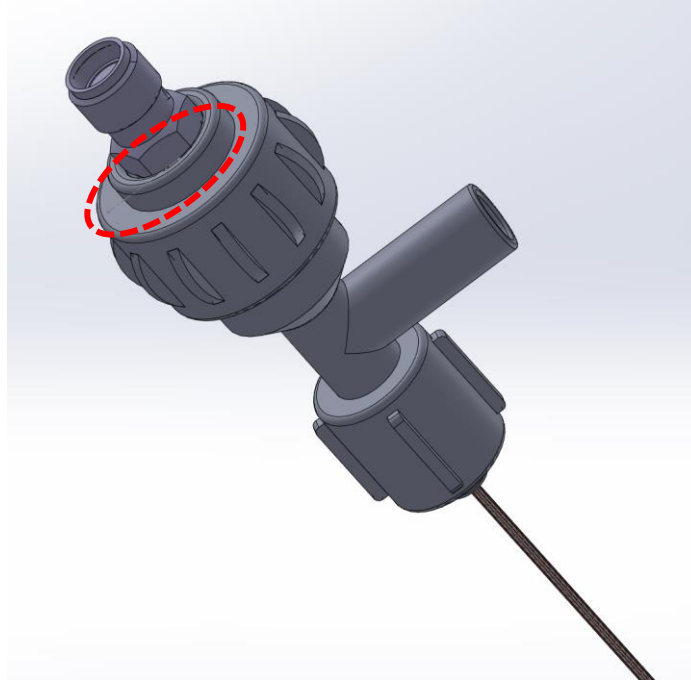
Mounting of the valve onto the coaxial cable. Red indicates where epoxy glue should be applied.
